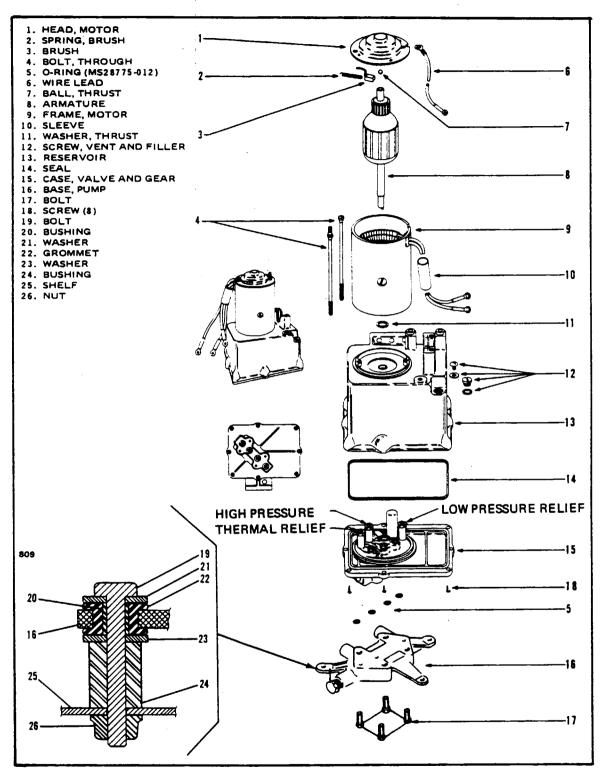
Hydraulic pump/Reservoir, Exploded View
